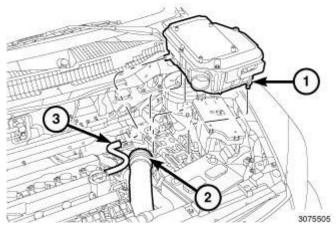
Air Cleaner Body, Air Inlet Tube & Make-Up Air Hose Courtesy of CHRYSLER GROUP, LLC
